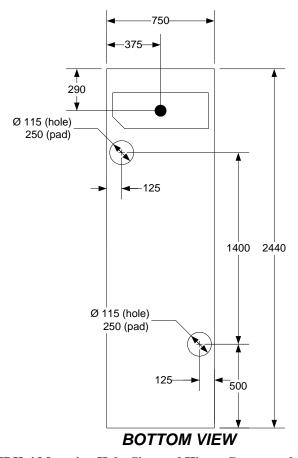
MDK-4 Mounting Hole, Size, and Hirose Connector location (units in mils)
